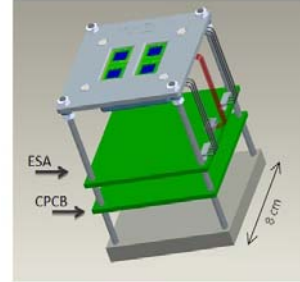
Breadboard model with colloid thruster module and electronic power and control boards (ESA&CPCB)
